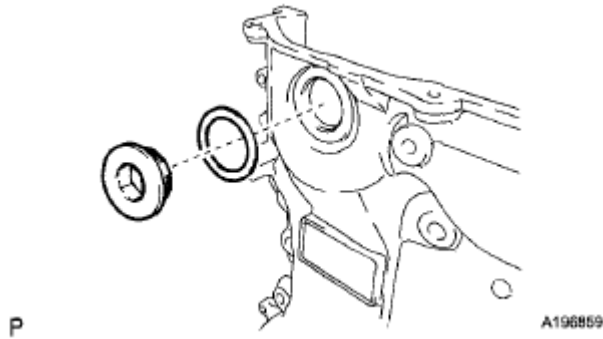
Identifying Timing Chain Cover Tight Plug And Gasket
